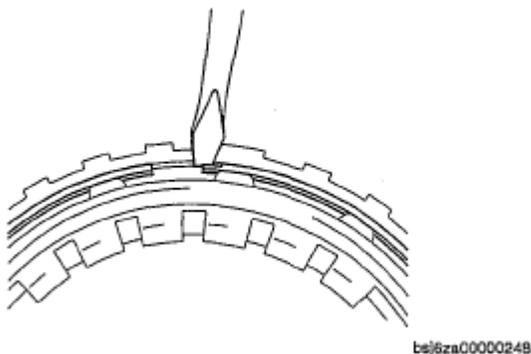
Removing Snap Ring From B3 Brake Cylinder Using Flathead Screwdriver
